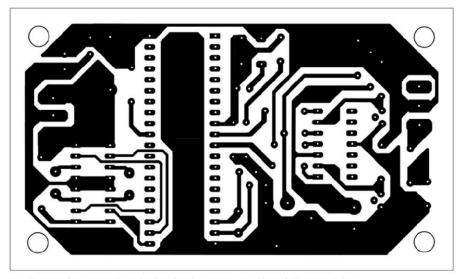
Actual-size, single-side PCB for the automated line-following robot
